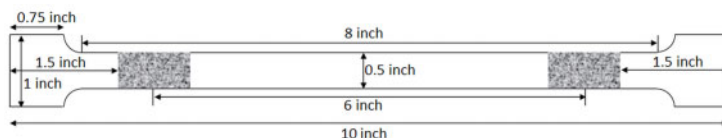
Schematic of the tensile test specimen with dimensions (top view). Two weld zones (textured) at the top layer are illustrated.
